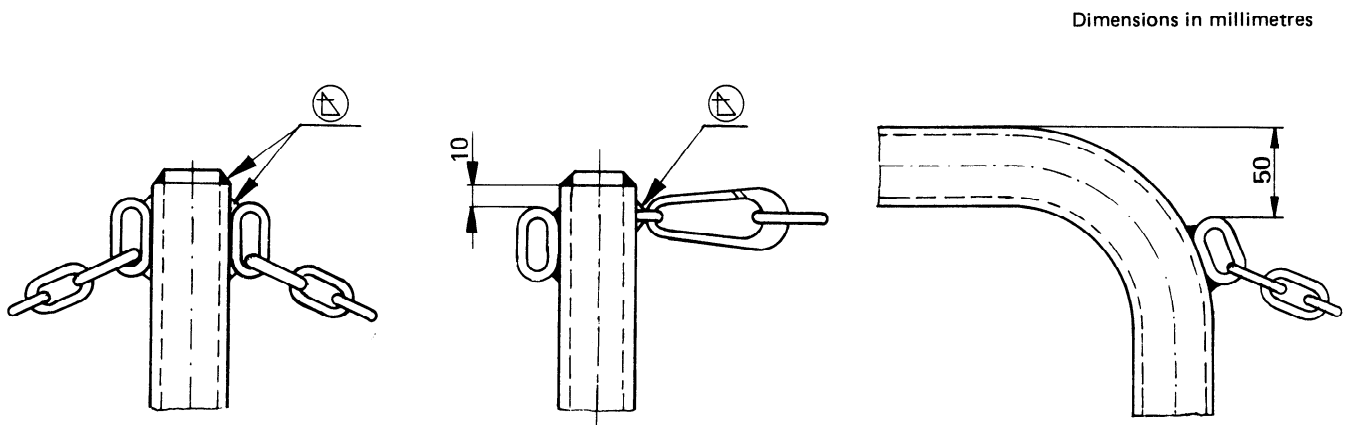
Methods of fixing the chains on stanchions and handrail
